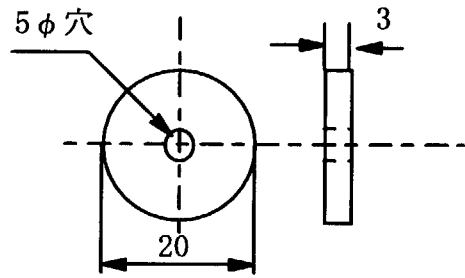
Washer used as metal/metal-crevice test piece made of SUS316L
